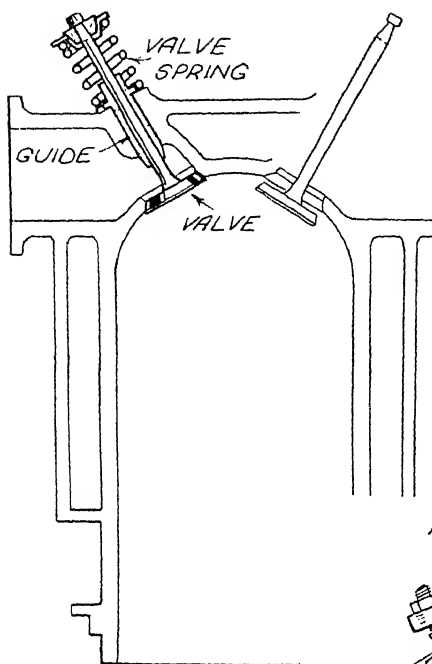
CYLINDER ASSEMBLY SHOWING VALVE SPRING AND GUIDE.
